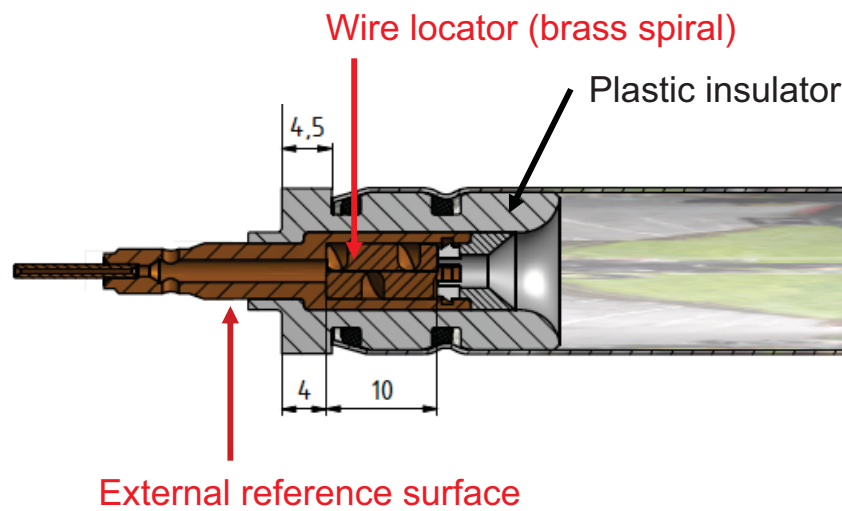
Cross section of an sMDT endplug with internal wire locator and external reference surface for tube and wire positioning during construction and for wire position measurement [5].
